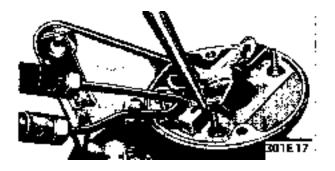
E-I 7 Solder Positive Brush Lead to Brush Holder
